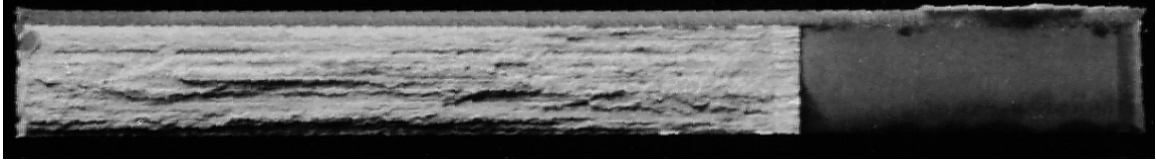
Fracture surface of side-grooved 6Al-4V Ti specimen loaded dynamically.
